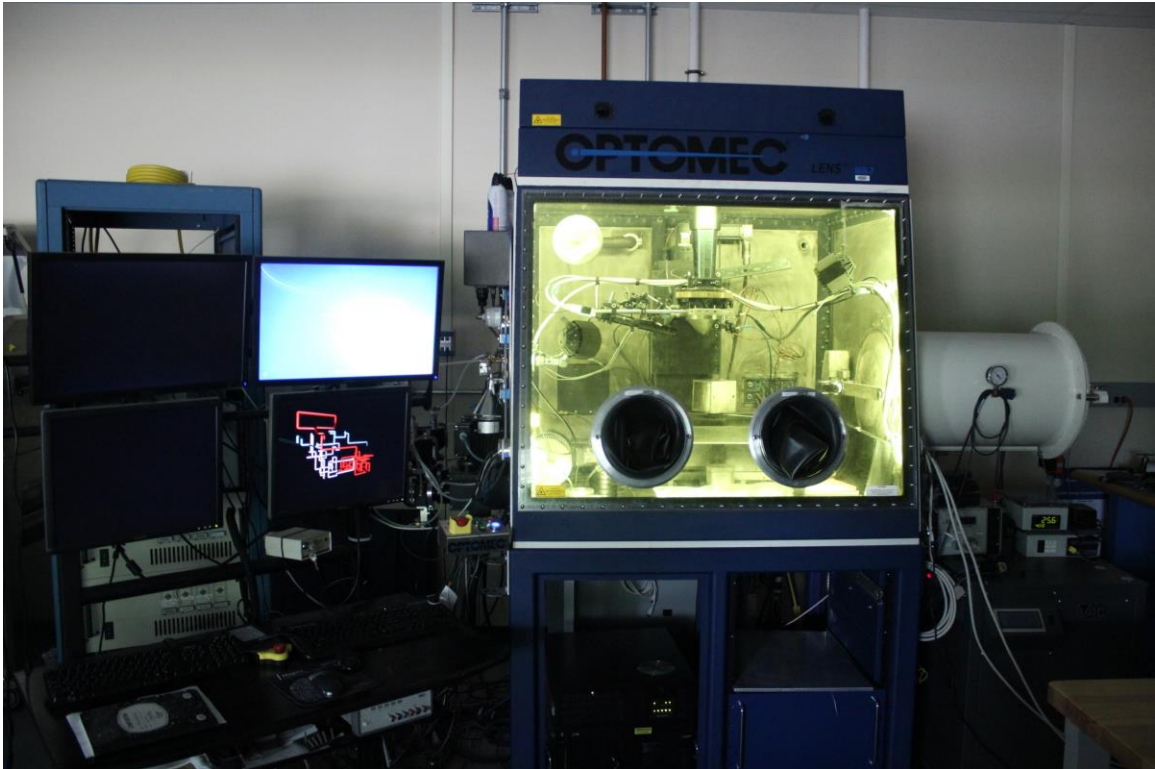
Optomec LENS® MR-7 DED Machine.
